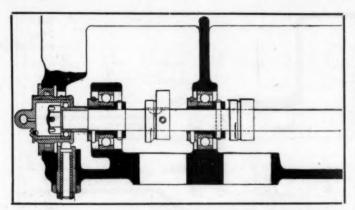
Crankshaft of Lozier 72, showing the location and attachment of the four annular ball bearings
